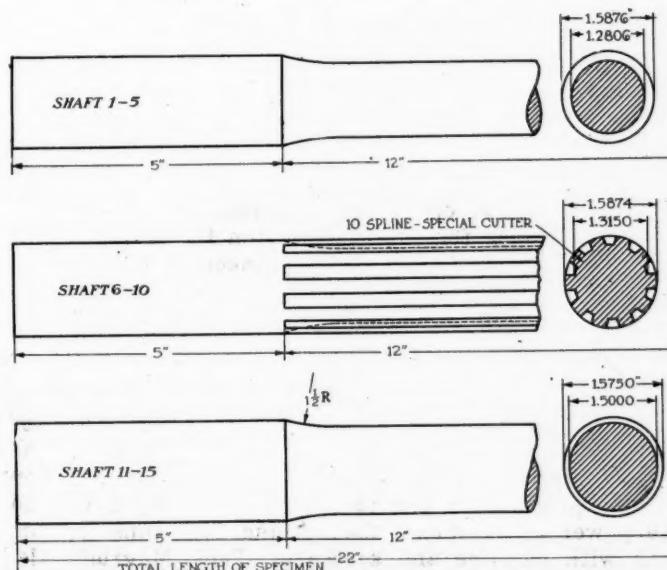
Dimensions of test pieces used in splined shaft torsion tests
